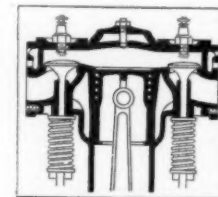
Section of a T-head cylinder showing the spark plugs located over the inlet and exhaust valves as used in double ignition work
